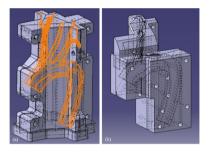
Casting mould generated in CAD for the wax model, failed attempt with one casting mould (a) and several moulds for the individual vessel models (b)
